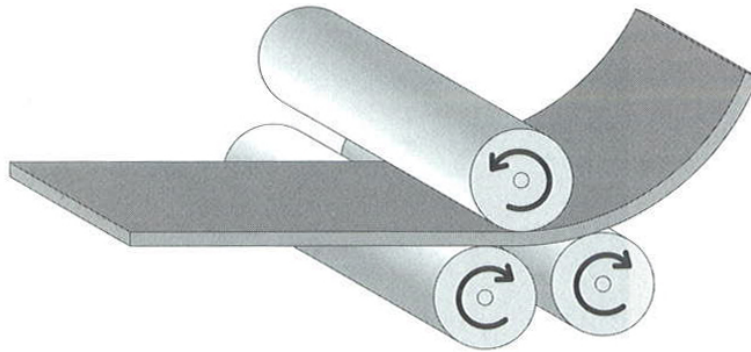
Diagram of a three-roll machine bending sheet metal or plate
